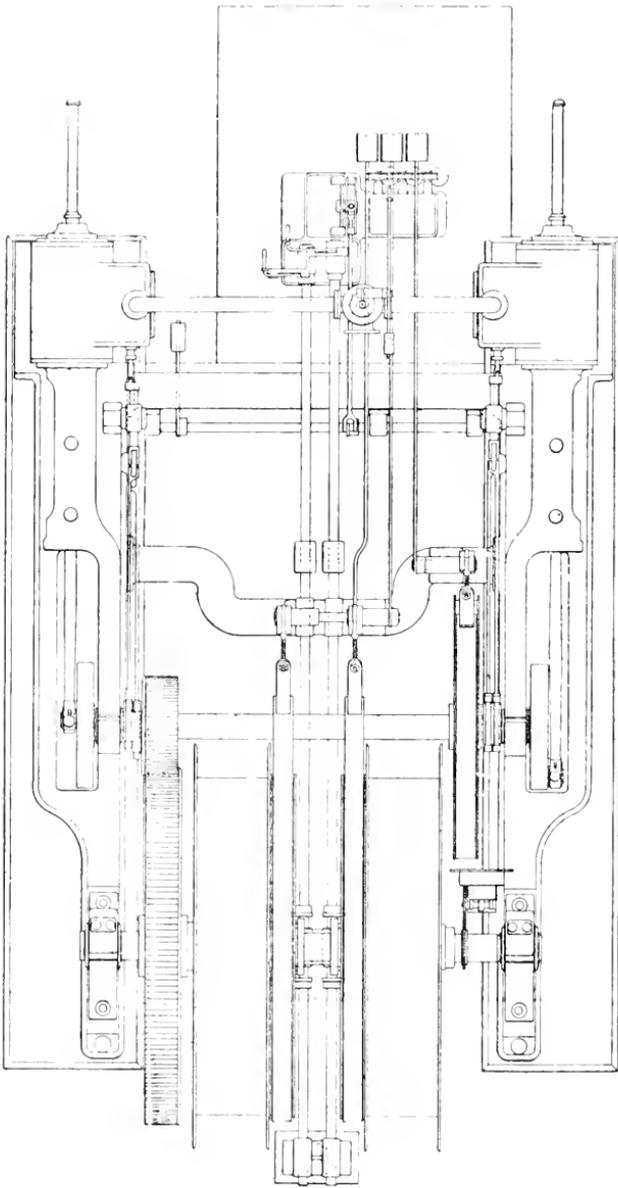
35 H.-P. COUPLED GEARED WINDING ENGINE FITTED WITH TWO LOOSE DRUMS.
